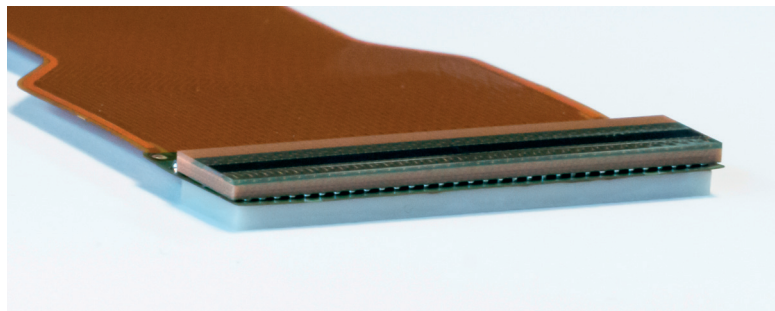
Assembled SiPM on the Kapton flex PCB using solder balls.
